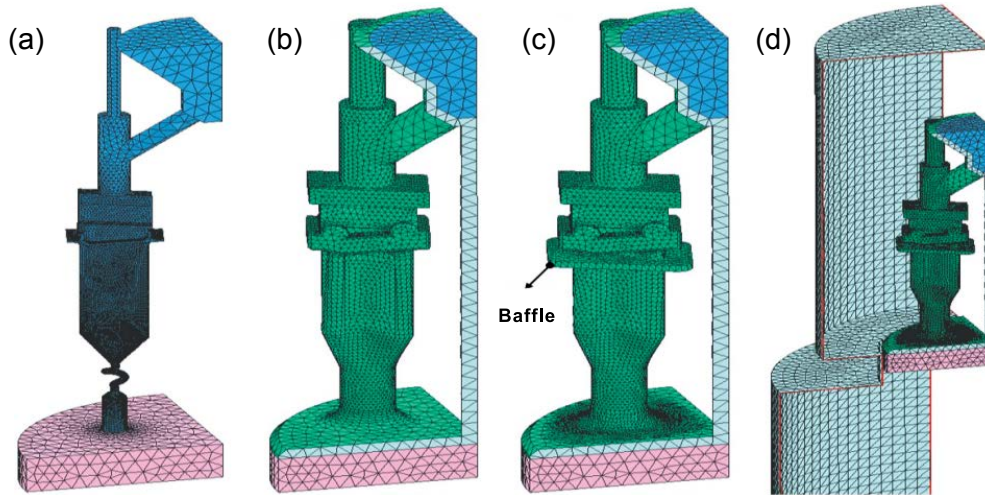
Grid model of casting system: blade (a); traditional mould (b); improved mould (c); and directional solidification system (d)
